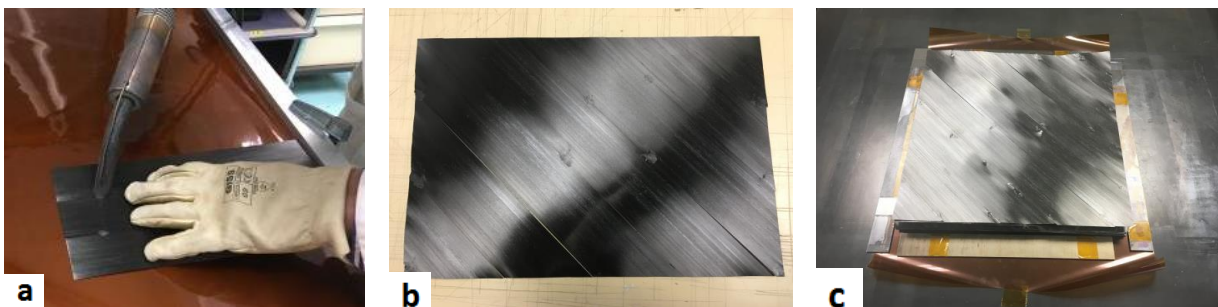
Pictures of the edge to edge welding of PEKK tapes (a), a 45° ply (b) and a $\pm 45^{\circ}$ stack (c)
